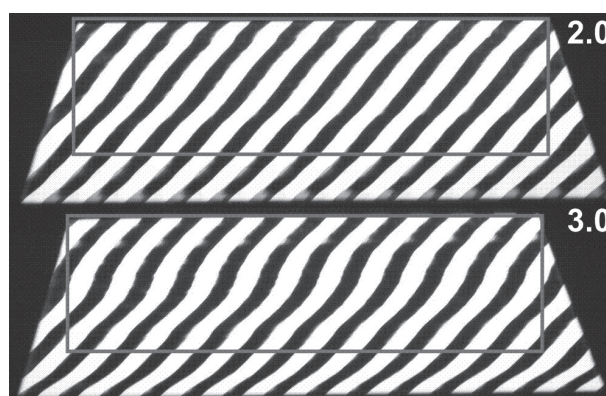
Good and poor quality bottom parts of glass sheets with a specification of the measured parts
